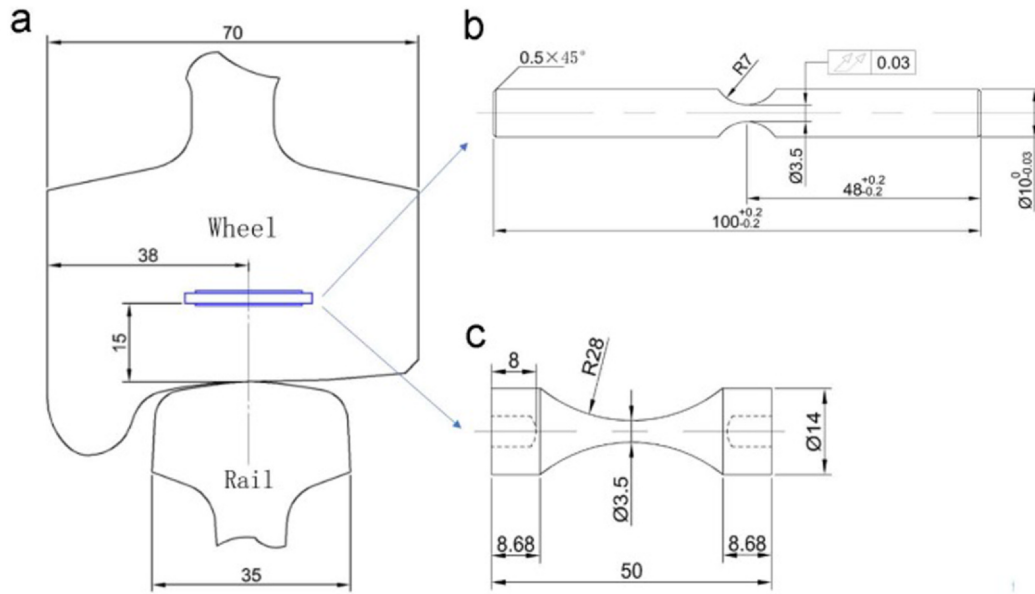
(a) Test specimen sampling locations and specimen dimensions (units: mm) for the (b) rotating bending fatigue tests and (c) ultrasonic fatigue tests.
